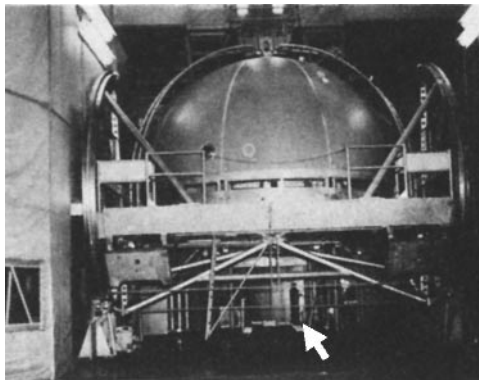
Weld joint configuration for Saturn SIV-B rocket.
